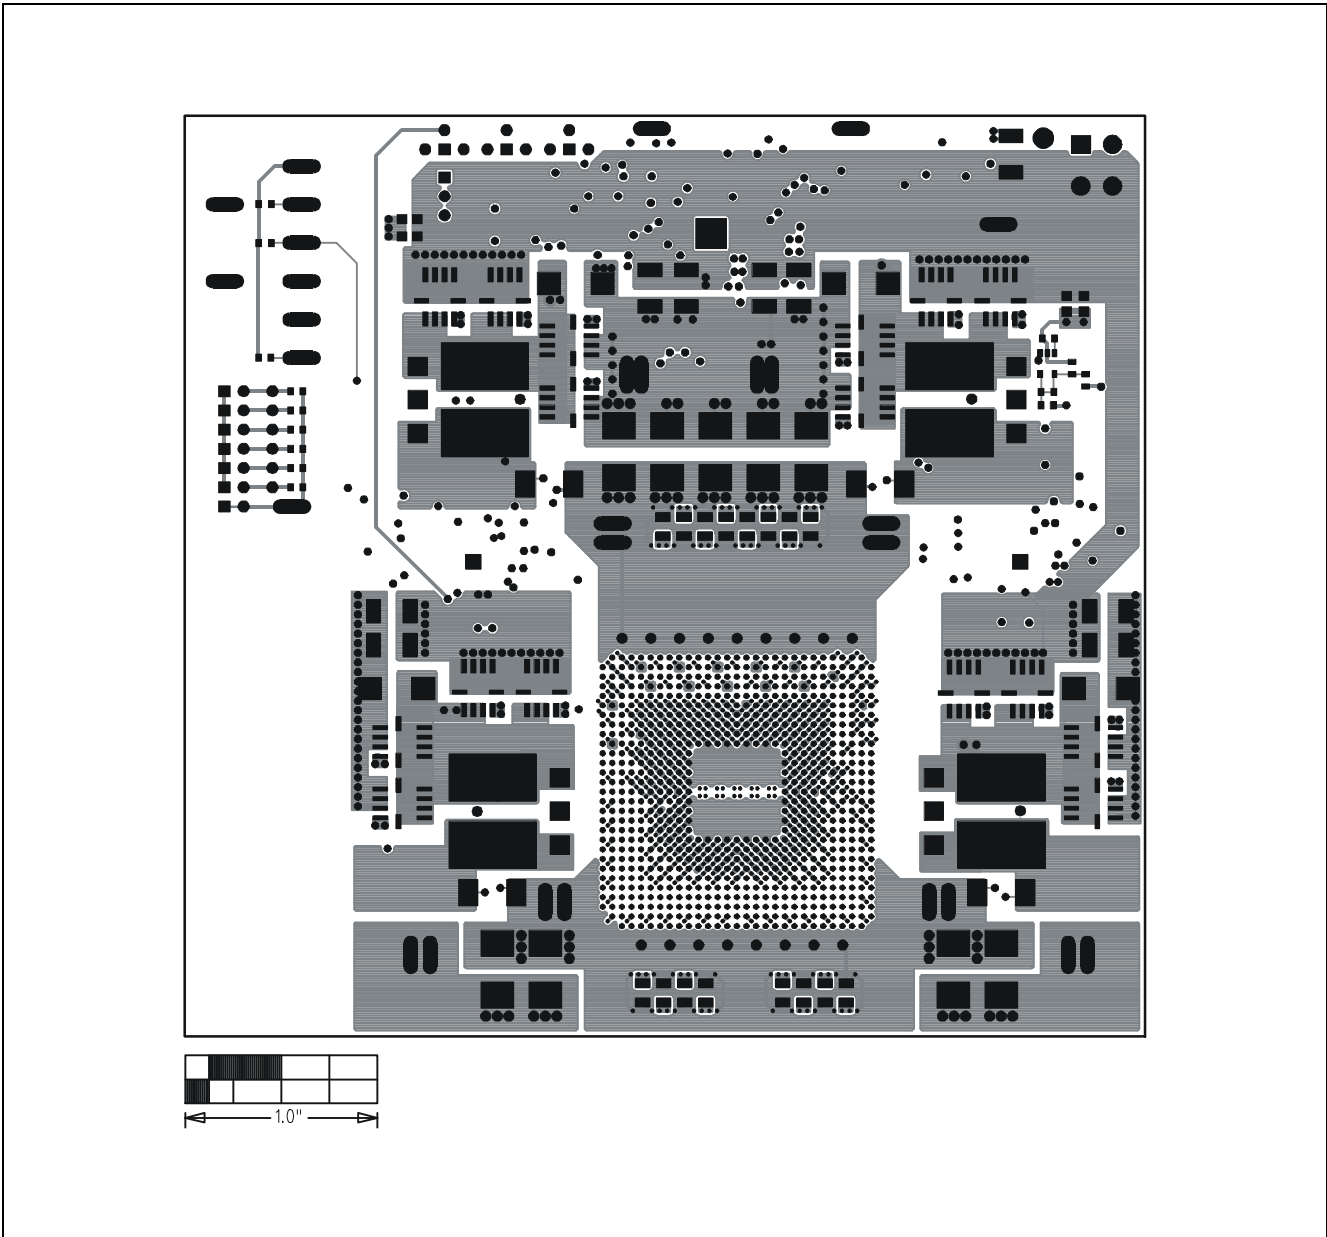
MAX1544/MAX1545 EV Kit PC Board Layout – Top Side
